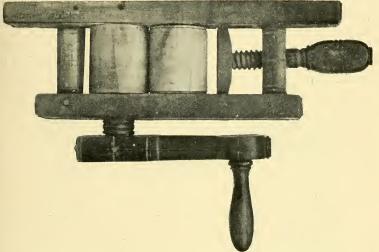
WOODEN MILL FOR FLATTENING THE STRAW "SPLINTS."
